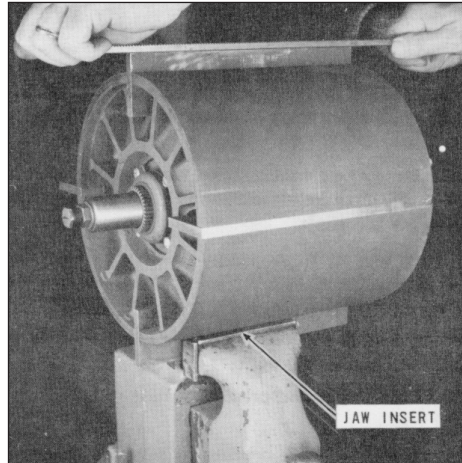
Filing Edge of Blade Using Vice with Jaw Inserts to Protect Blades
